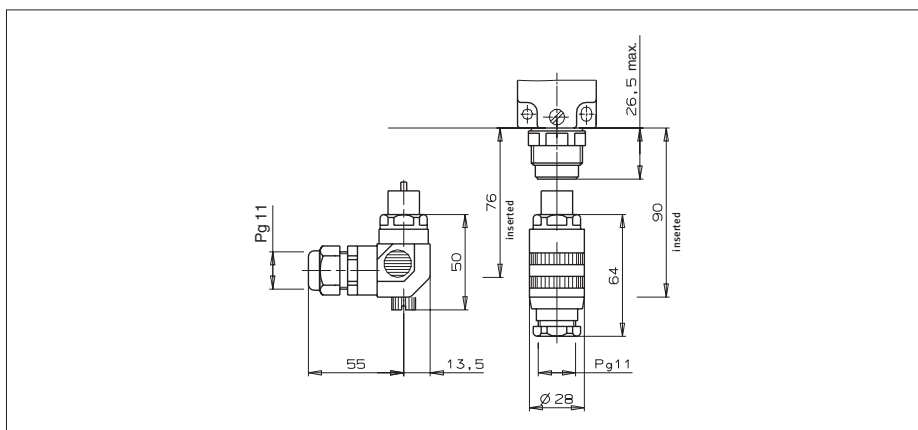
Dimension drawing NZ2VZ-5... with plug connector SR6
